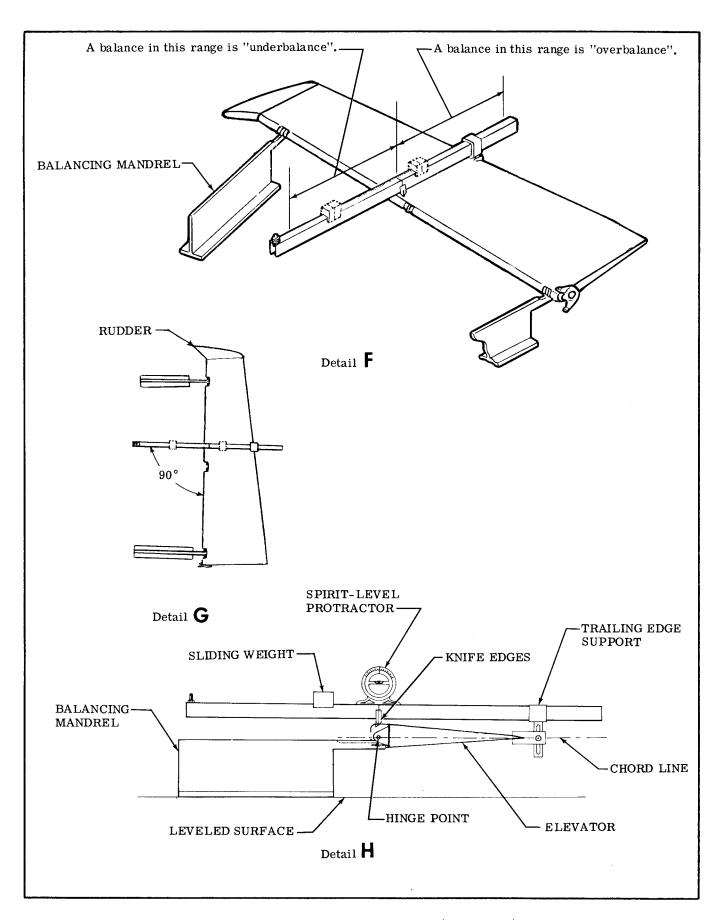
Control Surface Balancing (Sheet 4 of 5)
